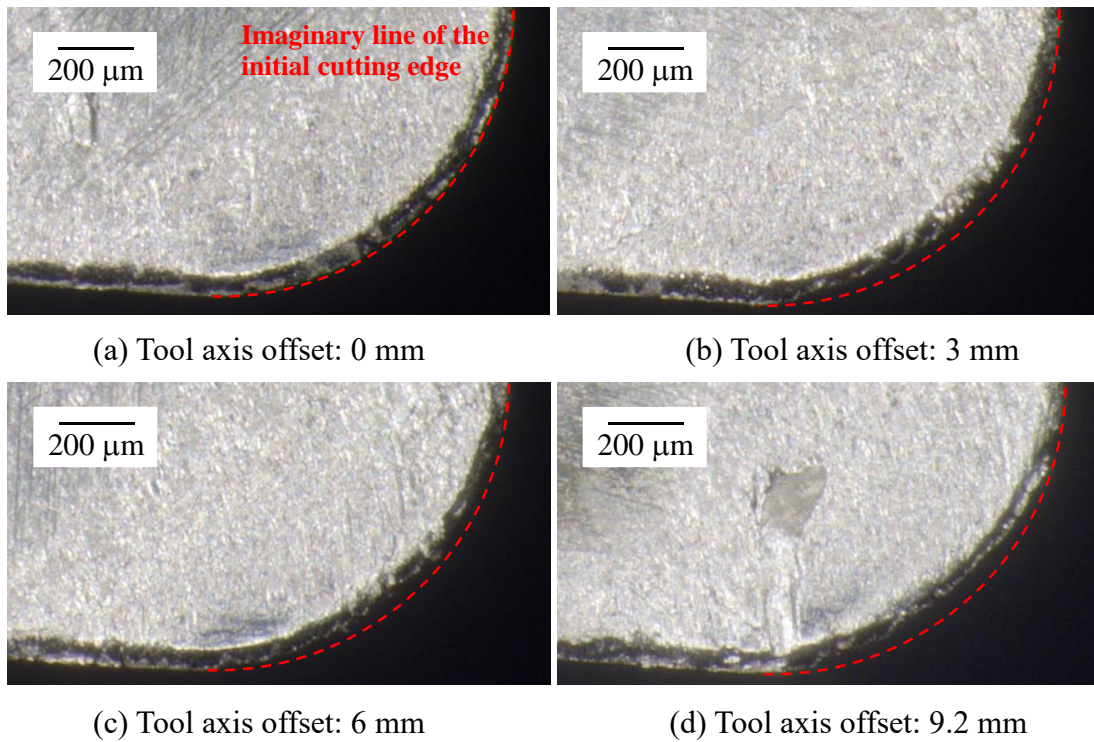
Comparison of rake face in each tool axis offset after tool life experiment.
